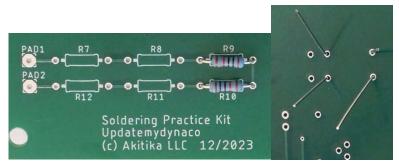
Install R9 and R10 from the component side and bend the leads on the solder side to hold them for soldering
